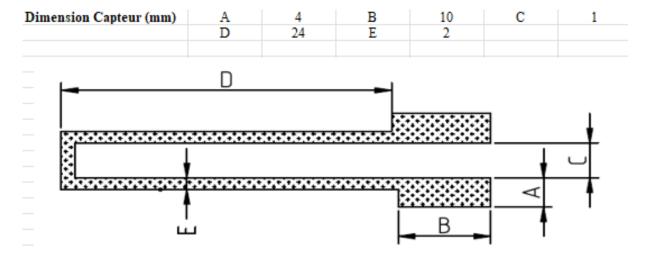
Sensor dimensions in millimeters. Extracted from Gaich and Stephen's GitHub.
